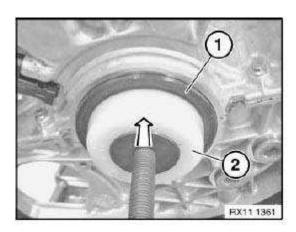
Crankshaft Screws And Special Tool (11 9 611) Courtesy of BMW OF NORTH AMERICA, INC.
